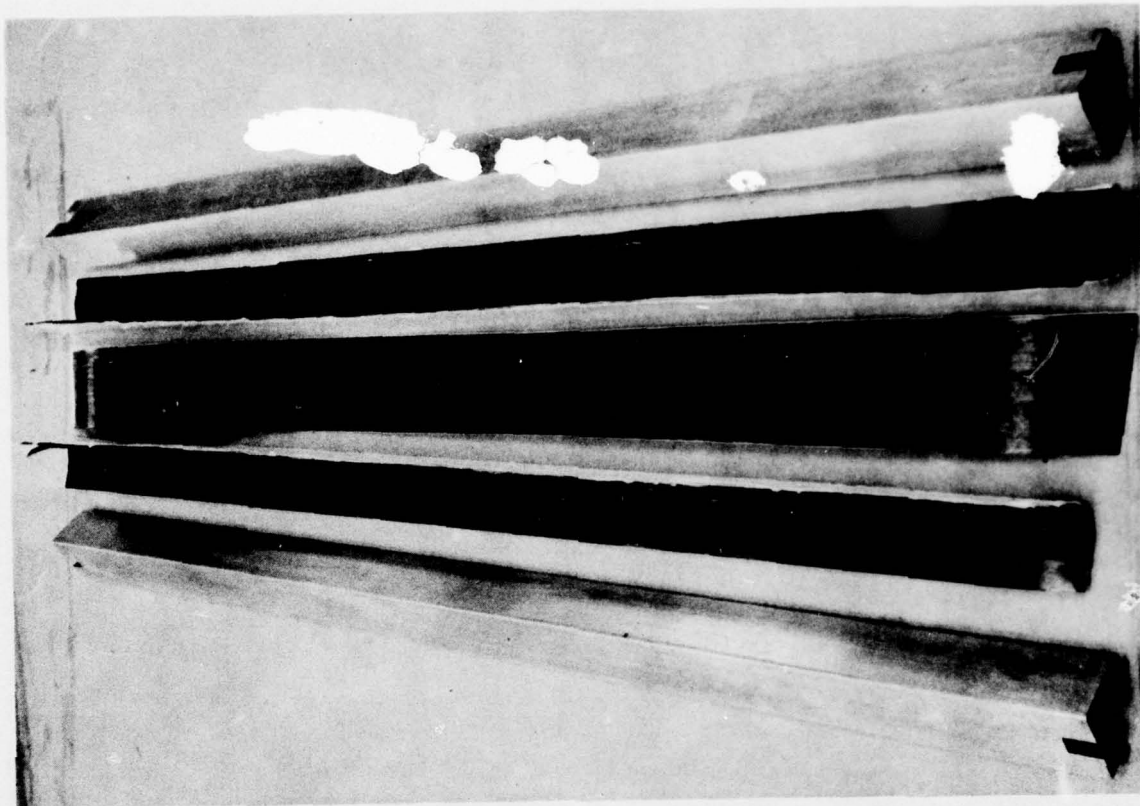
Component Stringer Parts and Tooling Prior to Fusing
